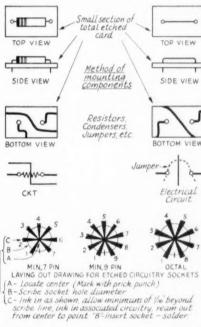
Samples of layout techniques such as jumpers, crossovers, eyes and components.
